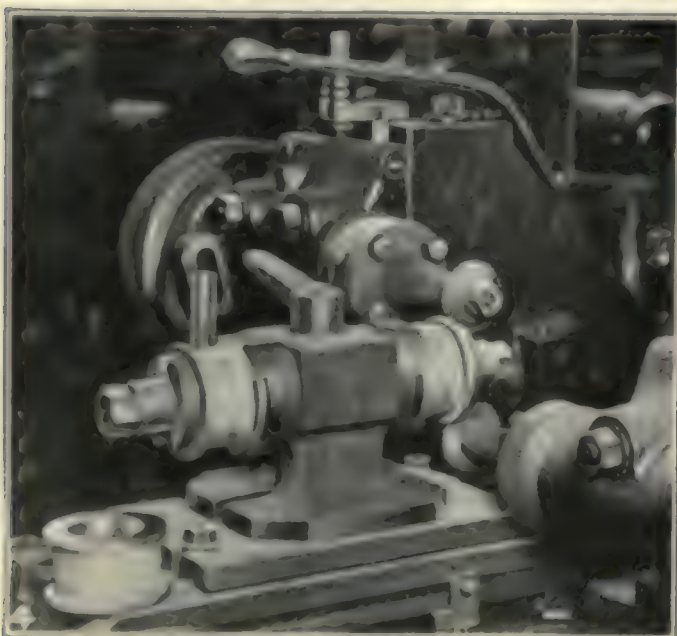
SLITTING BEARING ON BOTH SIDES IN DOUBLE ENDED, INDEXING FIXTURE
